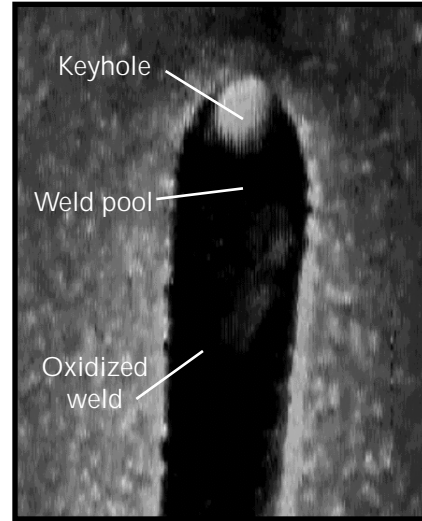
Simultaneous imaging of weld pool and keyhole.
